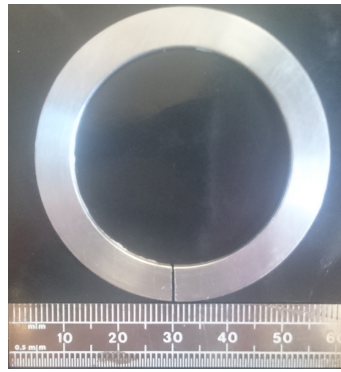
Photograph of aluminium ring with a 0.72 mm cut. The cut completely severs the ring so that it is discontinuous.
